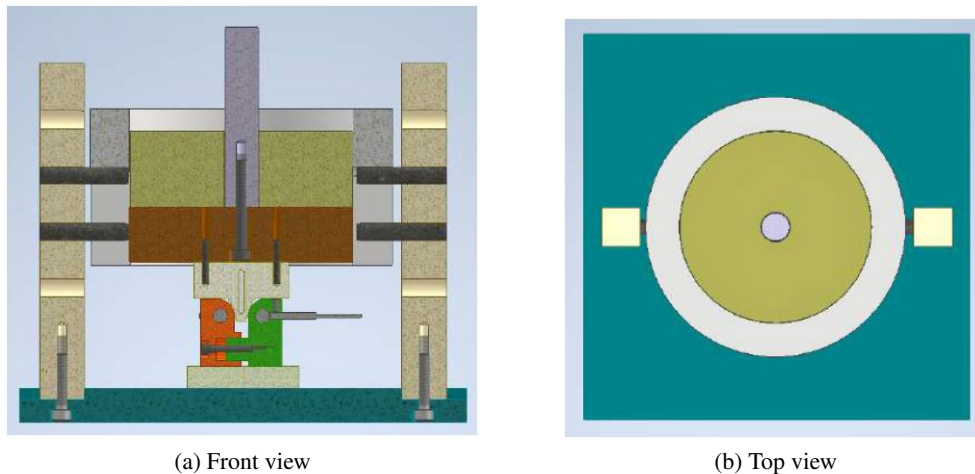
Final gear tooth heating system developed by Hooton [2].
